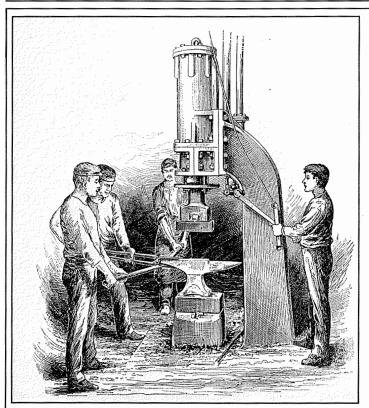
Welding top and bottom parts under steam hammer.
